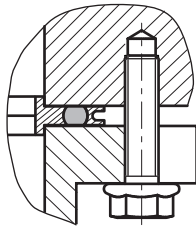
Flange connection ISO-F, hexagon head screw and tapped hole
